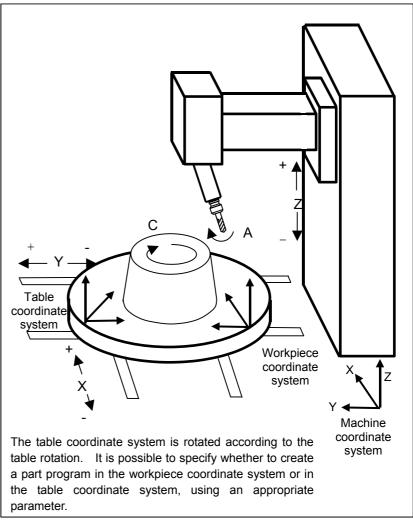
(a) Machine having a tool rotation axis and table rotation axis
